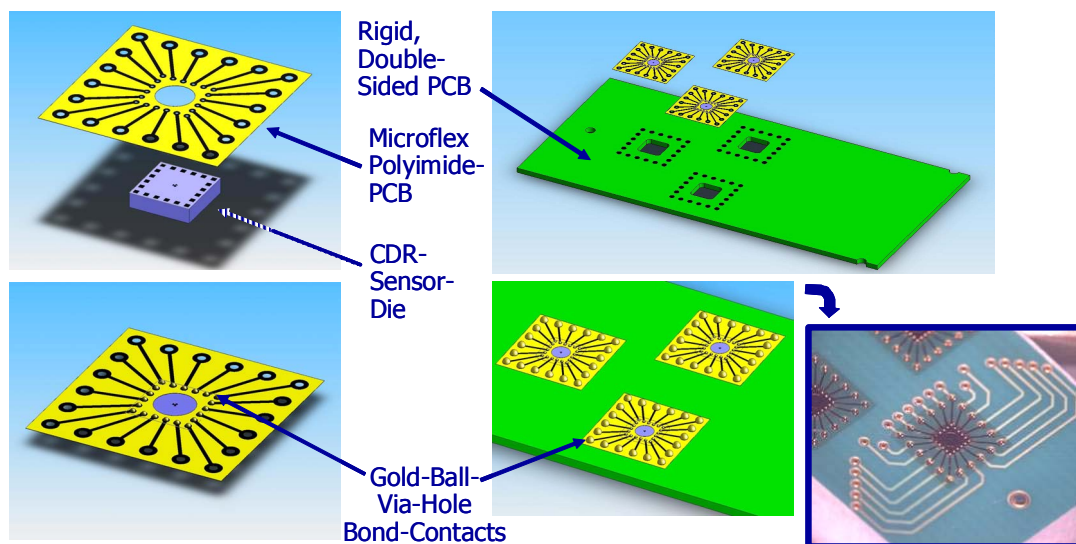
Electrical interconnection and assembly of the CDR sensors to the PCB
